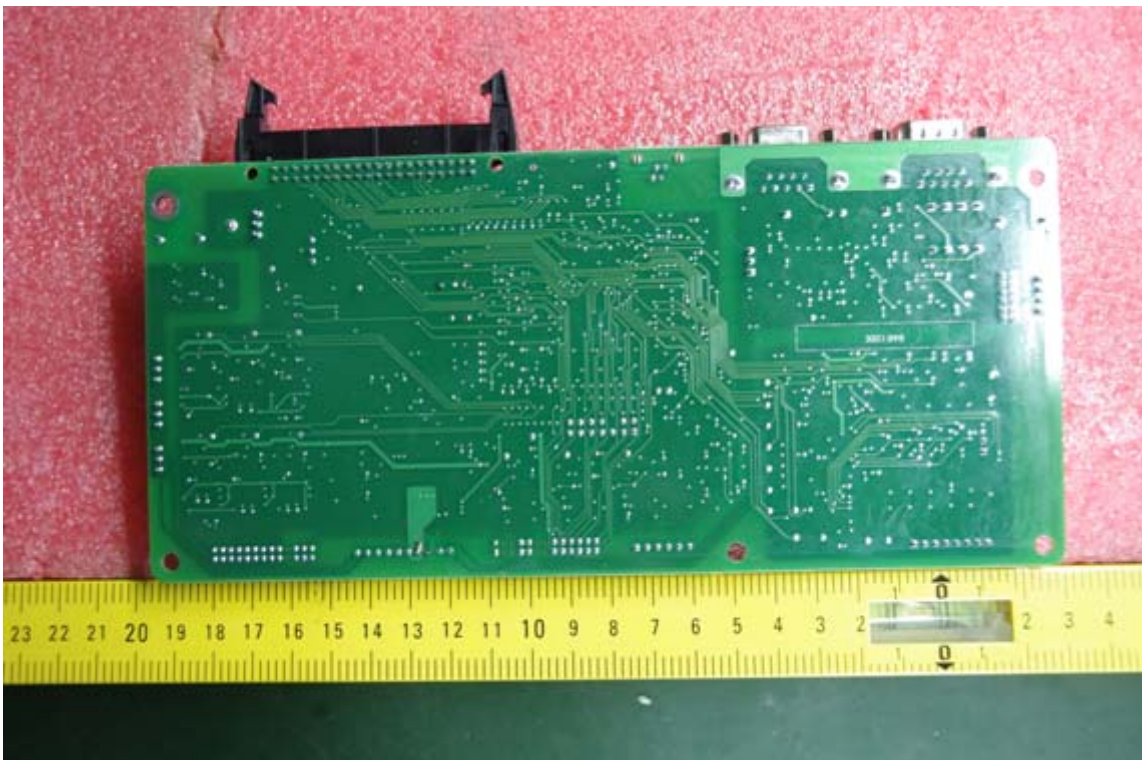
Board SNT\_PCB\_3320\_GJ, traces side view
